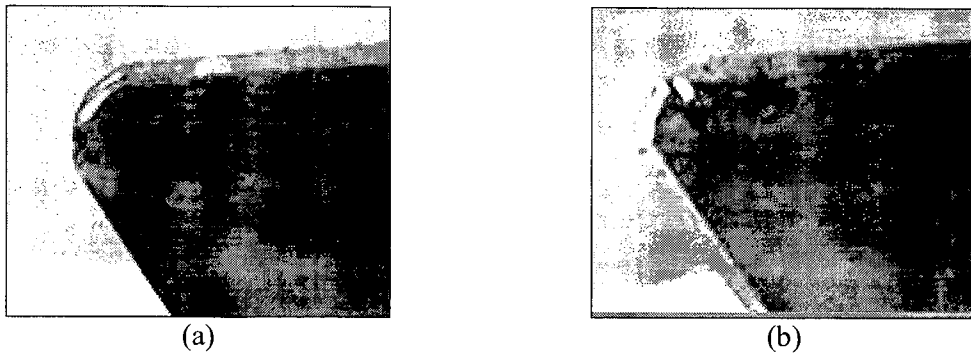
Aspects of the ceramic tool surface submitted to flank wear. a) Ceramic tool aspect after machining the material under development (MD). b) Ceramic tool after machining the commercial material (CM).
